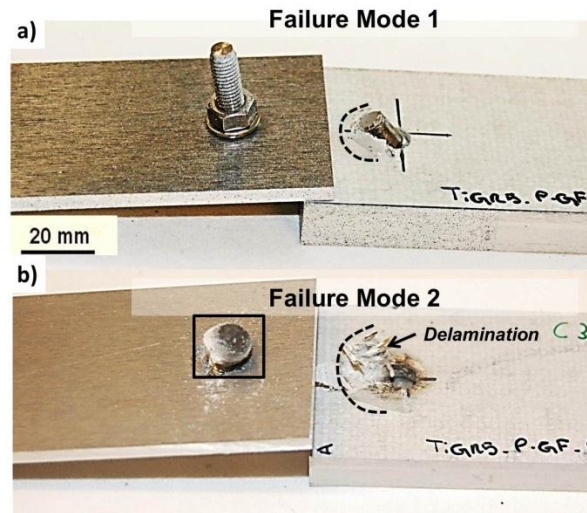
8 Fractured friction-riveted joints showing the two main failure modes.
